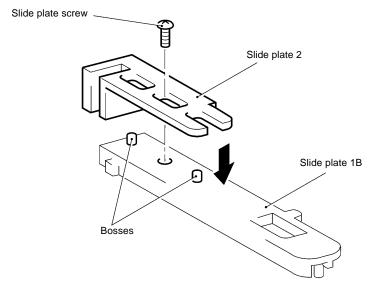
Reassembling the Dial Switch Holder Assy B (2)
